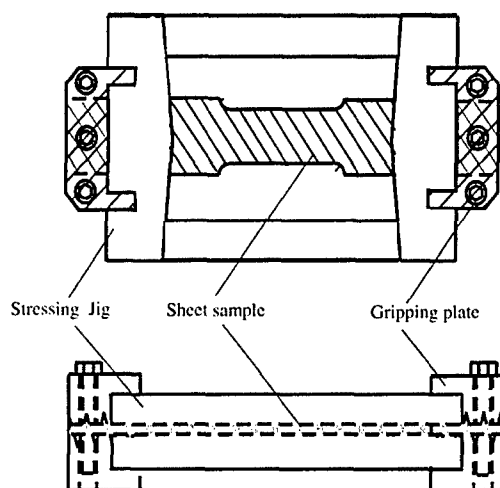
Schematic of modified ASTM G49 jig used to apply constant displacement.
